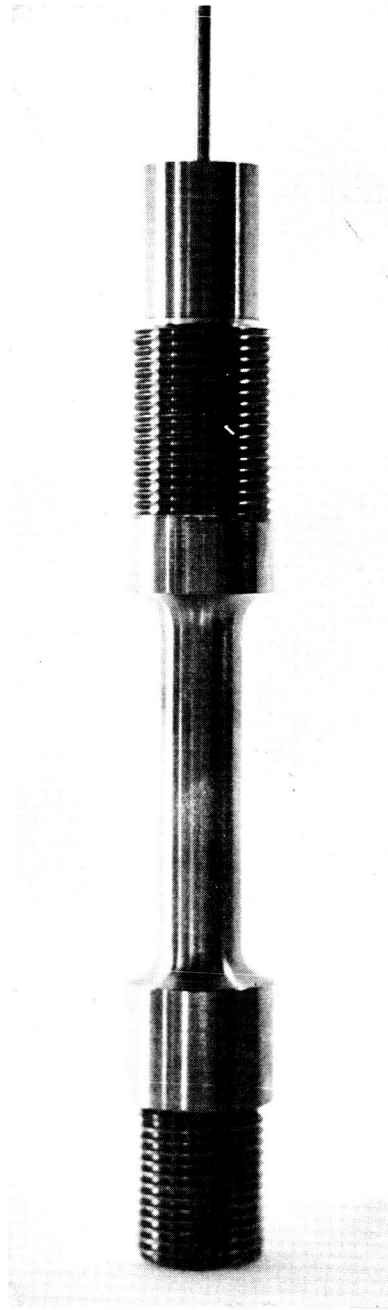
Specimen assembled with plug and small diameter tube for adding desired atmosphere. Specimen was machined from one-inch diameter rod.
